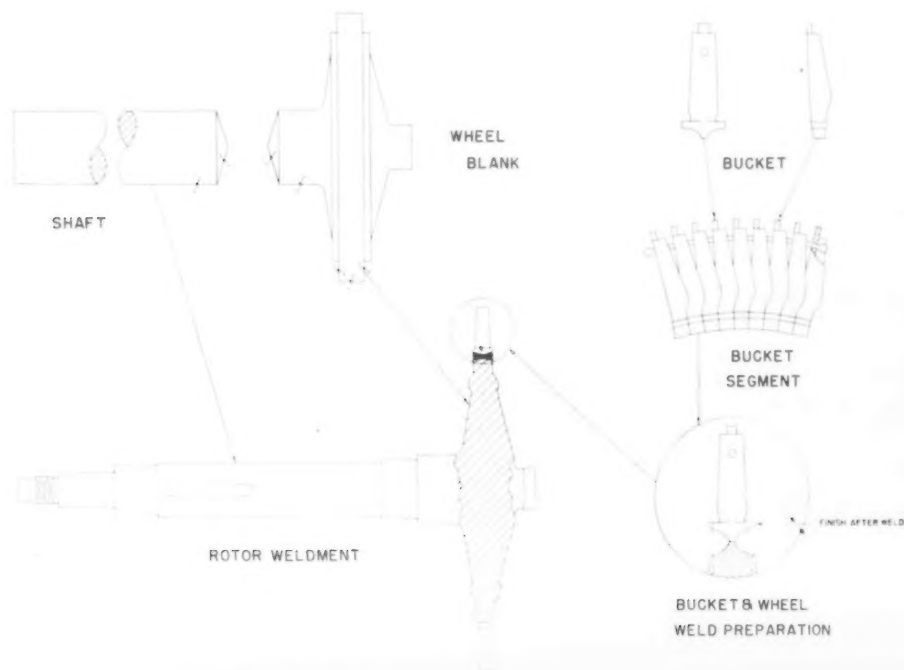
These are the turbine rotor components. The rotor is made up of a single weldment, with the shaft flash welded to the wheel blank and the buckets arcwelded to the rim of the wheel.
